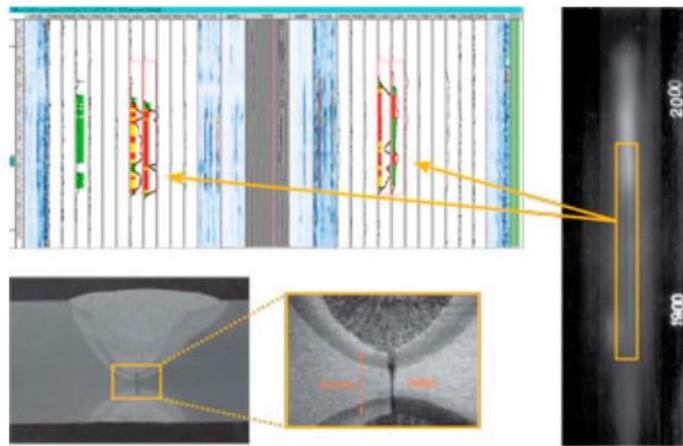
Example of ultrasonic weld inspection with evaluation (Olympos, 2021).
